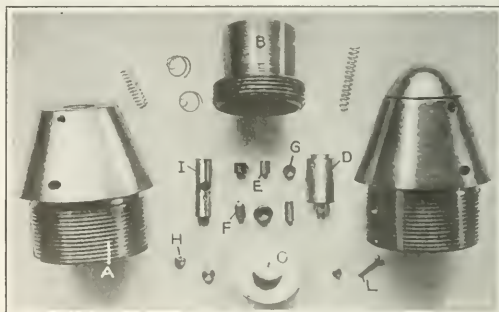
British No. 100 Graze High-explosive Fuse dismantled and assembled
